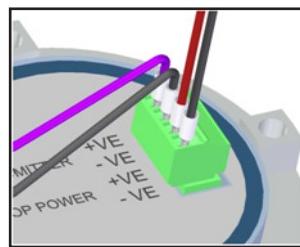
Terminal Block Mounting - Easidew PRO XP EX2 (Display)
